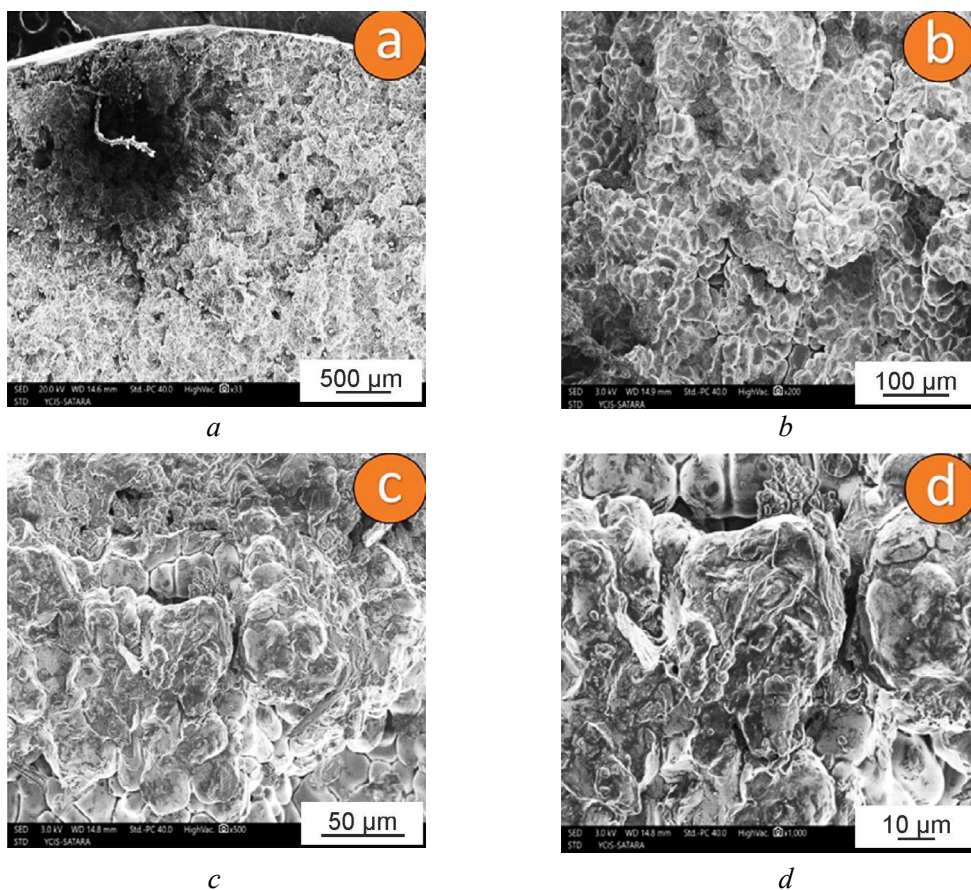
SEM images of fractured surfaces after tensile testing for Specimen 7
